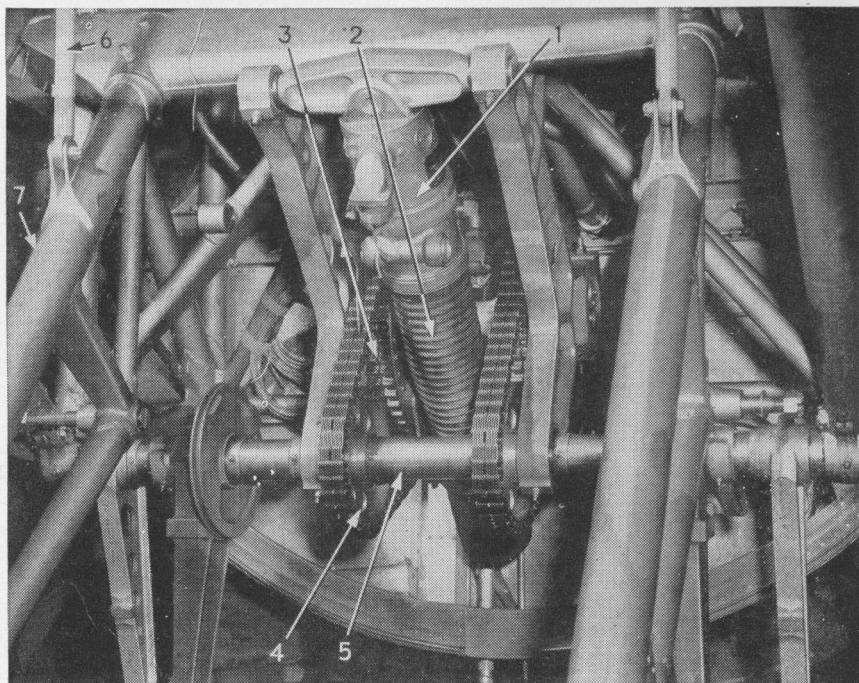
Landing gear retracting mechanism: (1) actuator; (2) boot over actuating screw; (3) upper sprocket; (4) lower sprocket; (5) torque shaft; (6) hydraulic snubber piston; (7) upper drag strut.
